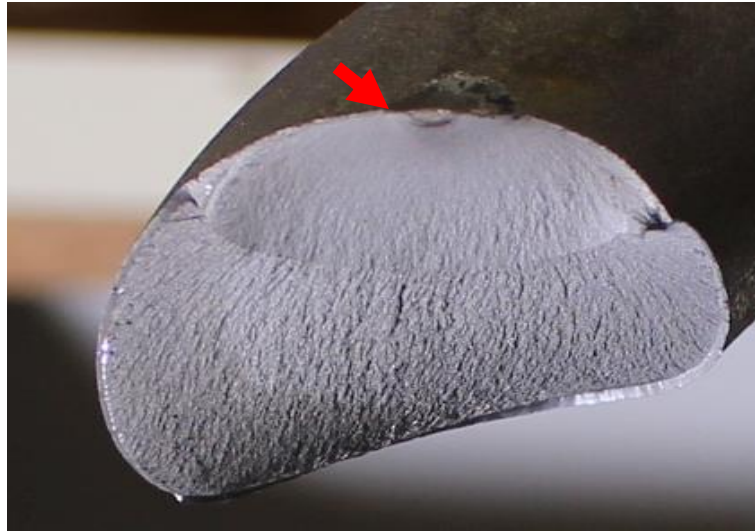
Fracture surface and initiation point of the failed spring.
